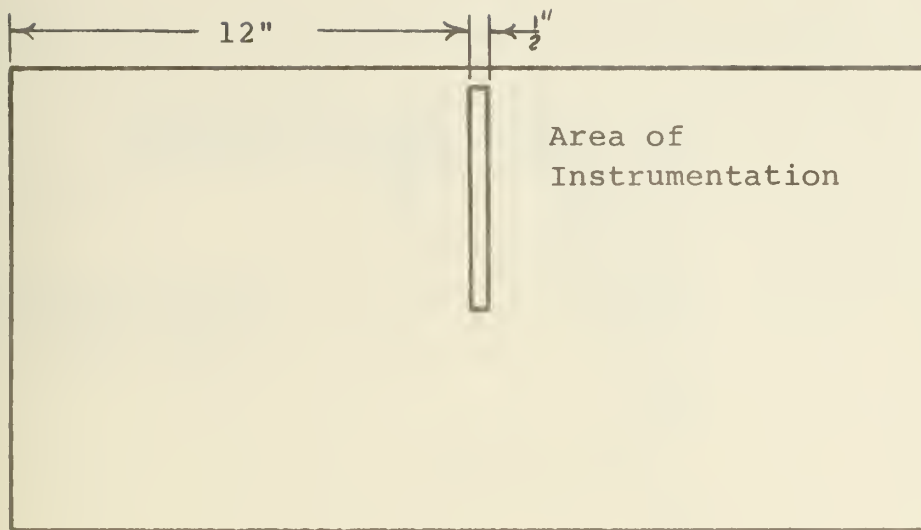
Location of Instrumentation on HY-130 Specimen I and 1020 Steel
